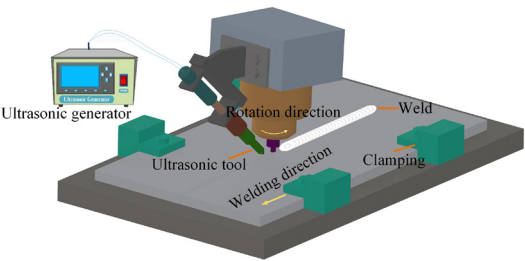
Schematic drawing of ultrasonic vibration enhanced friction stir welding (UVeFSW)
